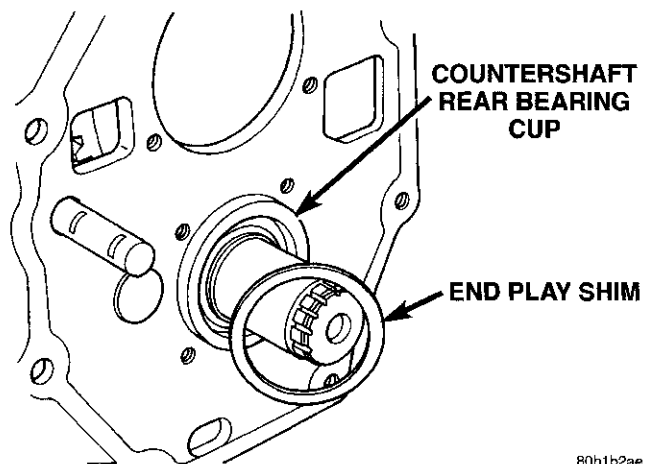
Countershaft End Play Shim And Rear Bearing Cup Removal
